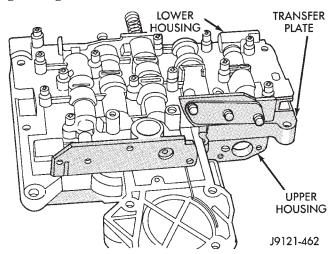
Assembling Valve Body Upper And Lower Housings—46RH
